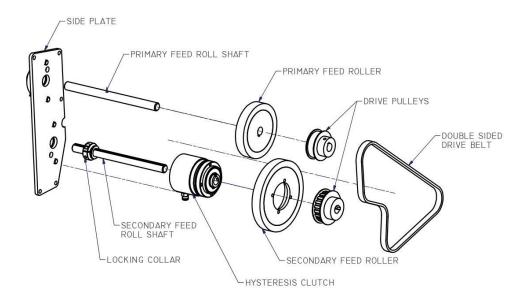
Exploded View of Rollers, Clutch, Belt, and Shafts
